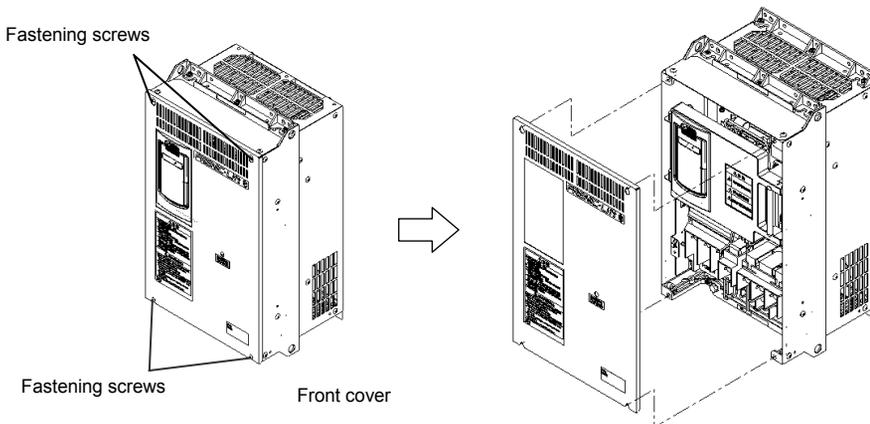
Removing and Mounting the Cover (FRN30LM1S-4□)
